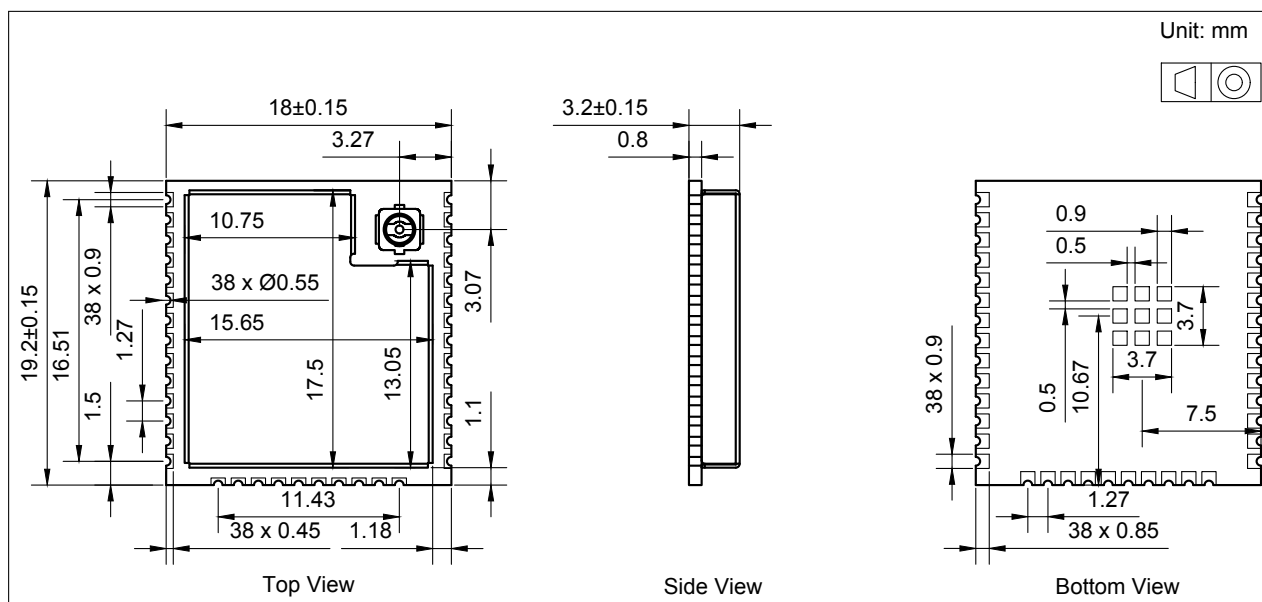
ESP32-WROOM-32UE Physical Dimensions
